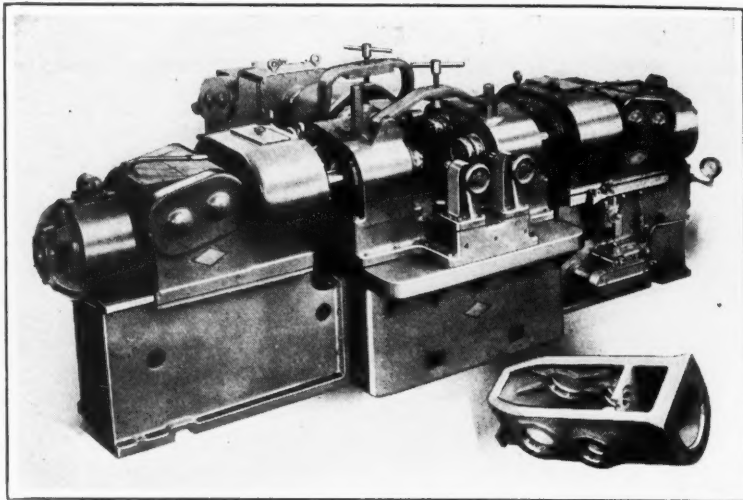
Three-way Horizontal Machine Built for Rough- and Finish-boring Tractor Transmission Cases
